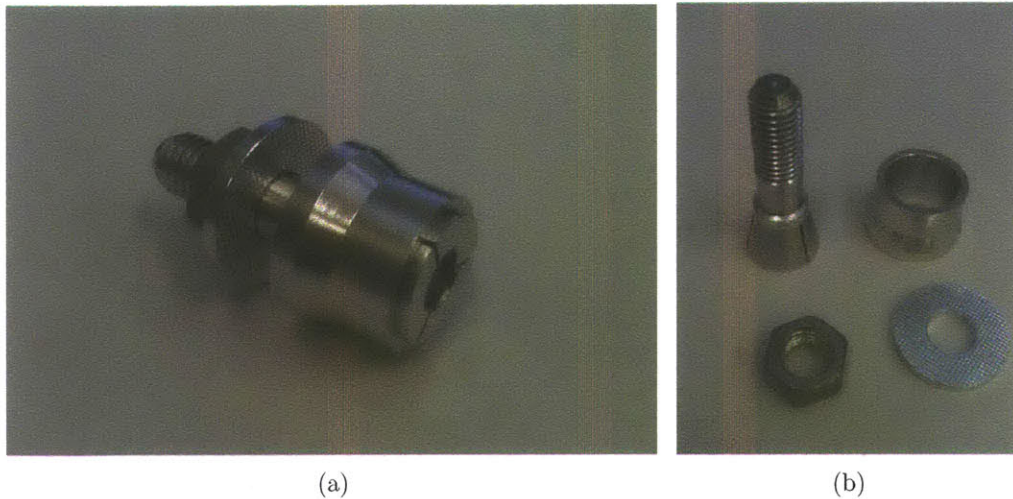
Collet-type proller adaptor: a) assembled; b) components.
